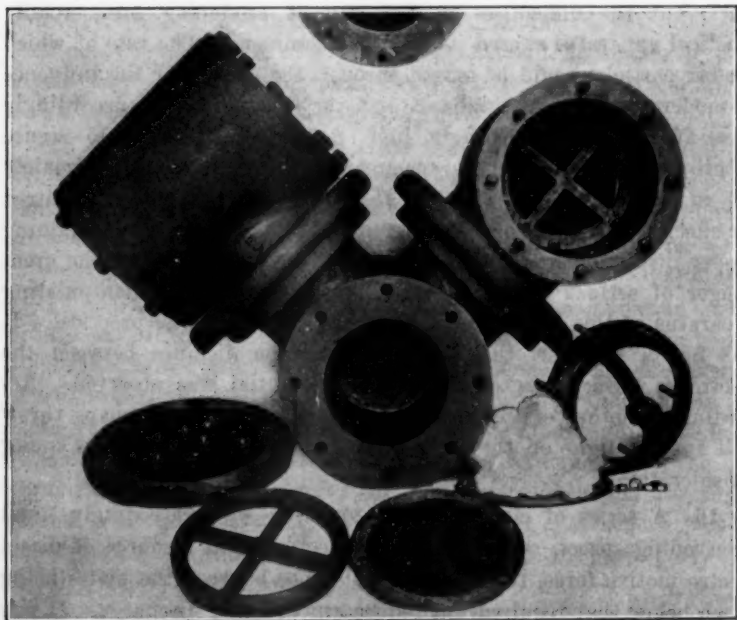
VIEW SHOWING VARIOUS PARTS OF COMMERCIAL EXTRACTOR
